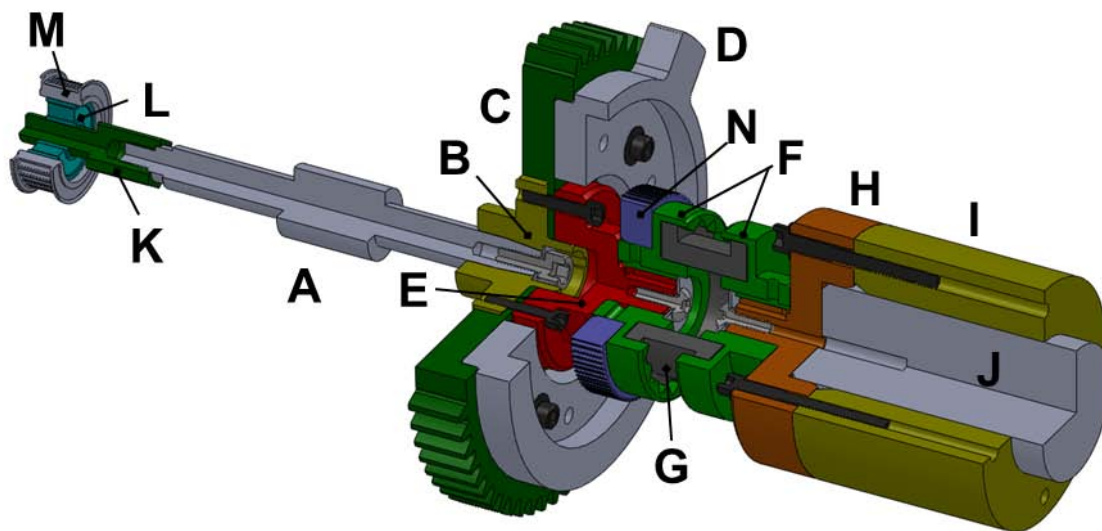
Quarter section view of engine shaft, dynamometer shaft, and associated hardware; body of the engine and dynamometer are not shown: A) engine shaft, B) engine hub, C) 60 minus 2 tooth spur gear flywheel, D) single tooth flywheel, E) engine shaft adapter, F) Martin Quadraflex coupling hubs, G) Martin Quadraflex coupling sleeve, H) dynamometer shaft adapter, I) keyed dynamometer collar, J) dynamometer shaft, K) rear side shaft extension, L) one-way bearing, M) starter timing belt pulley, N) encoder timing belt pulley.
